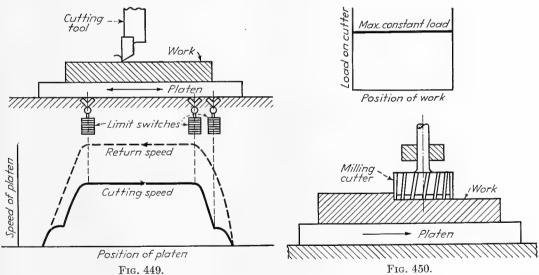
For high-speed cutting on a metal planer, the tool enters the work at a slow speed to prevent tool breakage, cutting speed is then increased, and near the end of the cut the cutting speed is reduced to prevent breaking out at edge of work. This speed control is accomplished by limit switches which put full field on the motor before the tool leaves work. After the return stroke, delayed acceleration keeps full field on motor until tool enters work; then the fast cutting speed is resumed.
